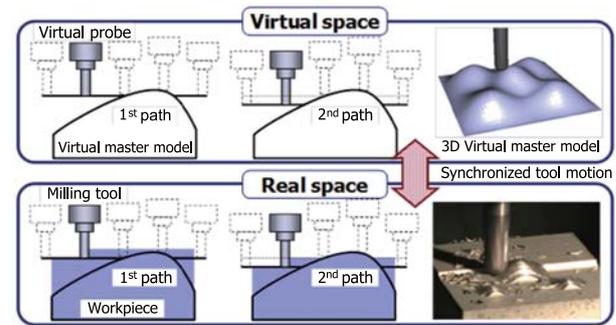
Real-time tool path generation in Digital Copy Milling (DCM).
